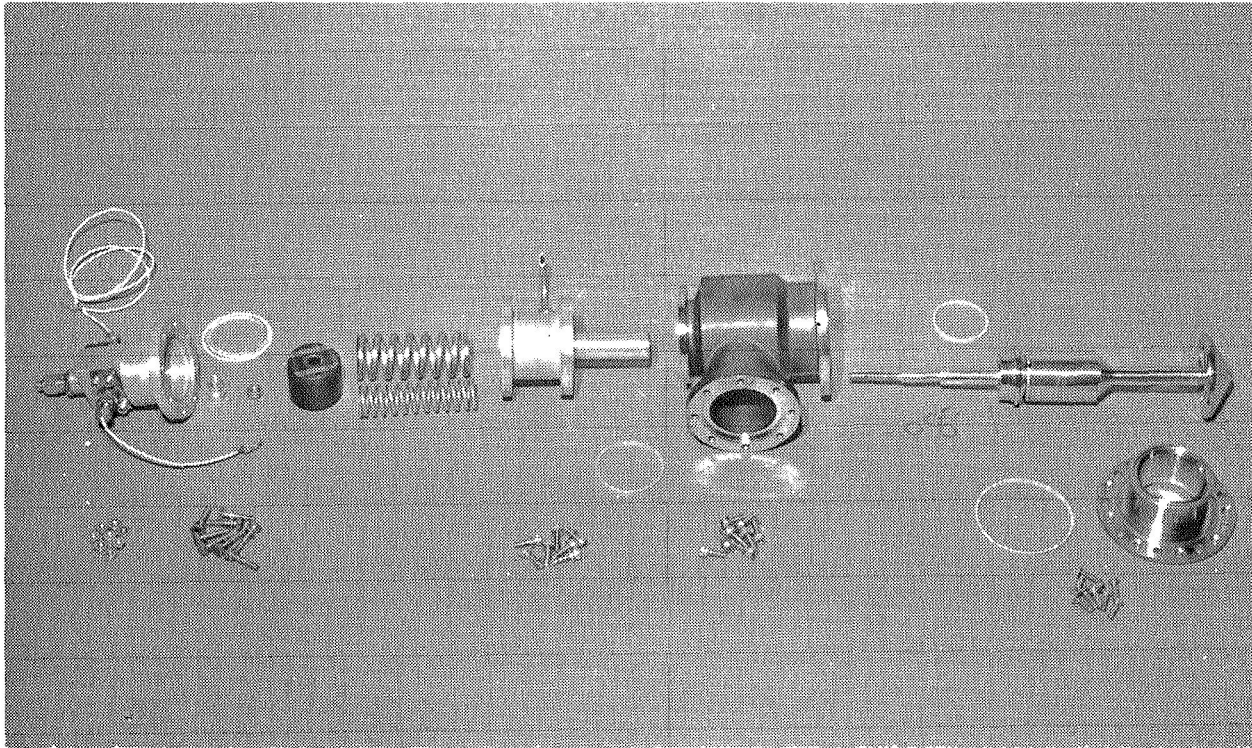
1 Valve After Task III Testing (Disassembled)
